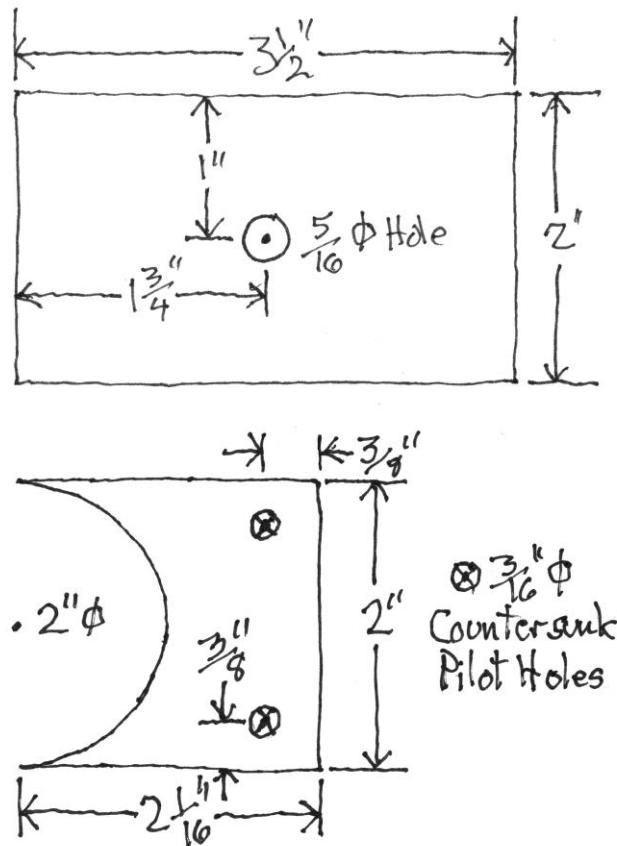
Patterns for cutting the telescope saddle parts and for drilling the holes in the four saddle end pieces of wood.
